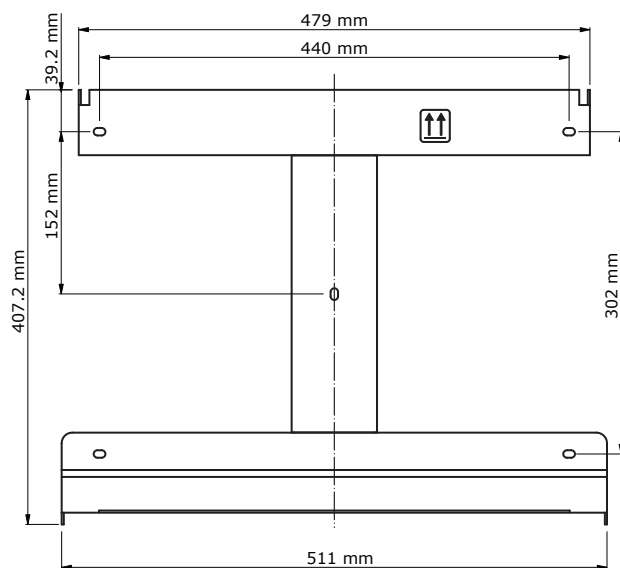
SolarLake 10000TL~17000TL Inverter Backboard
